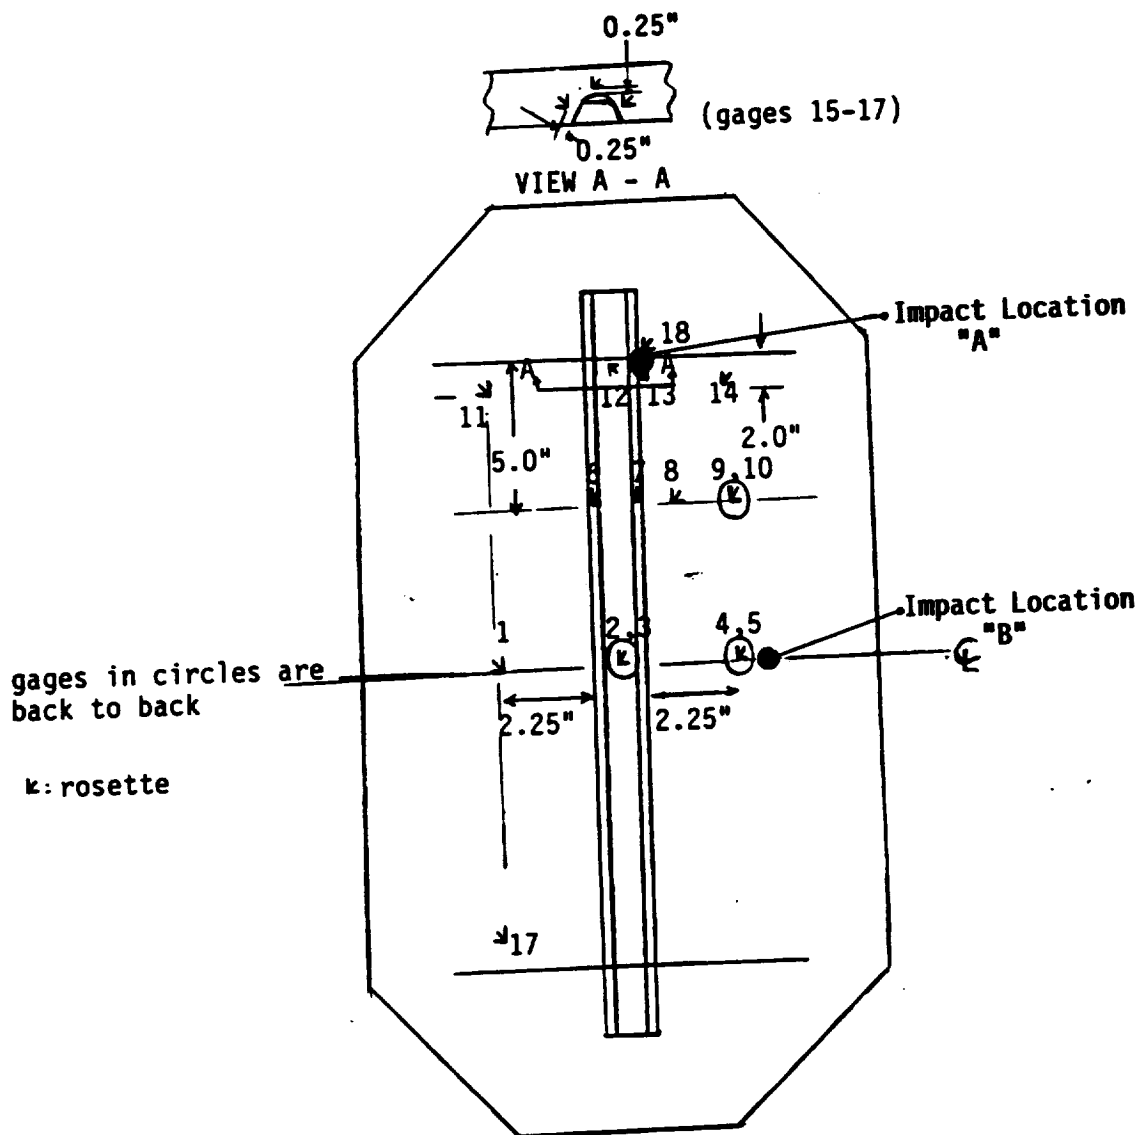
IMPACT DAMAGED SPECIMEN STRAIN GAGE LOCATIONS
